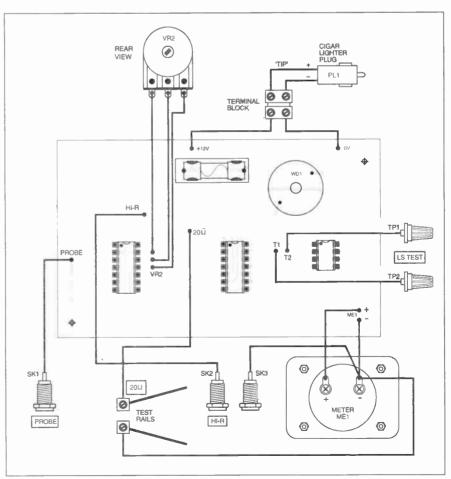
Interwiring from the printed circuit board to off-board components. The general layout within the case can be seen in the photographs.
